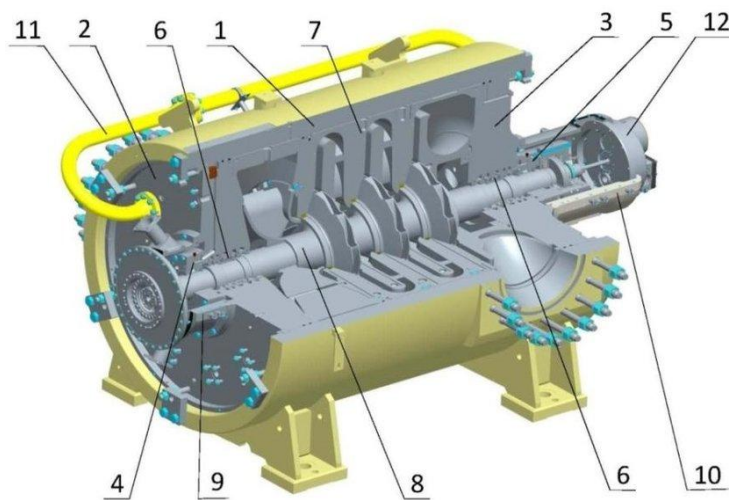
General view of centrifugal compressor: 1 – outer casing; 2 – front cover; 3 – rear cover; 4 – journal bearing; 5 – journal-thrust bearing; 6 – dry gas seal; 7 – inner casing; 8 – rotor; 9, 10 – enclosure; 11 – pipeline; 12 – oil pump. Figure taken from IOP Science. [12]
